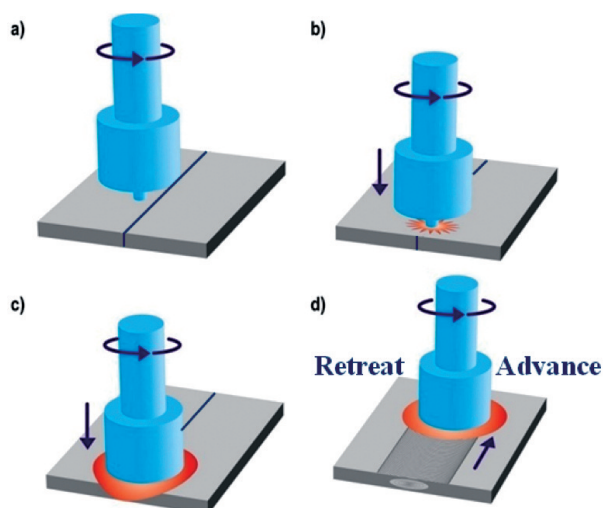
A schematic of FSW/P, showing the rotating, non-consumable tool in (a), frictional heating upon plunging into the work piece in (b), frictional and adiabatic heating in (c) and traversing of the tool to weld/process the work piece in (d).
